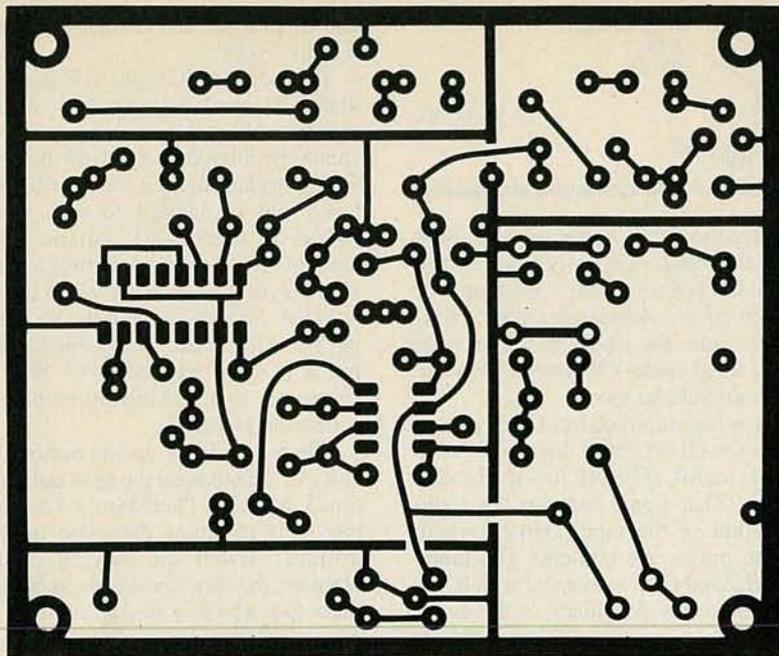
THE FOIL SIDE of the decoder board is shown here.
